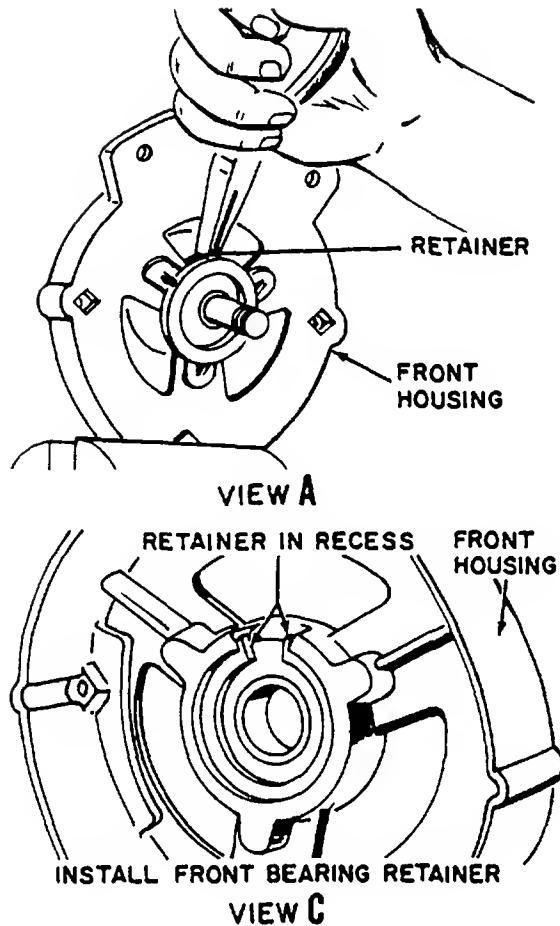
Alternator Assembly G2, Bearing Removal and Installation
